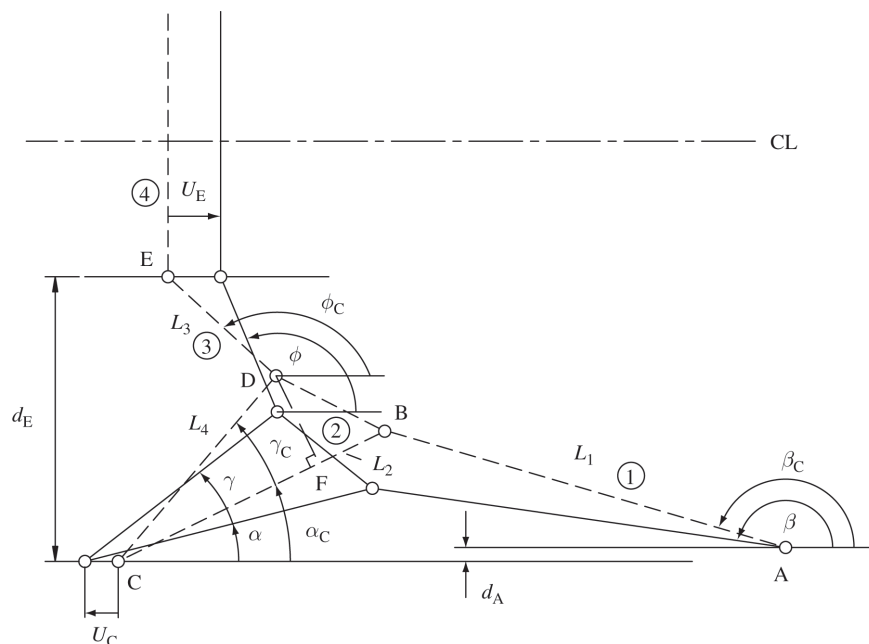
Geometry of the conventional toggle linkage during real mould clamping
